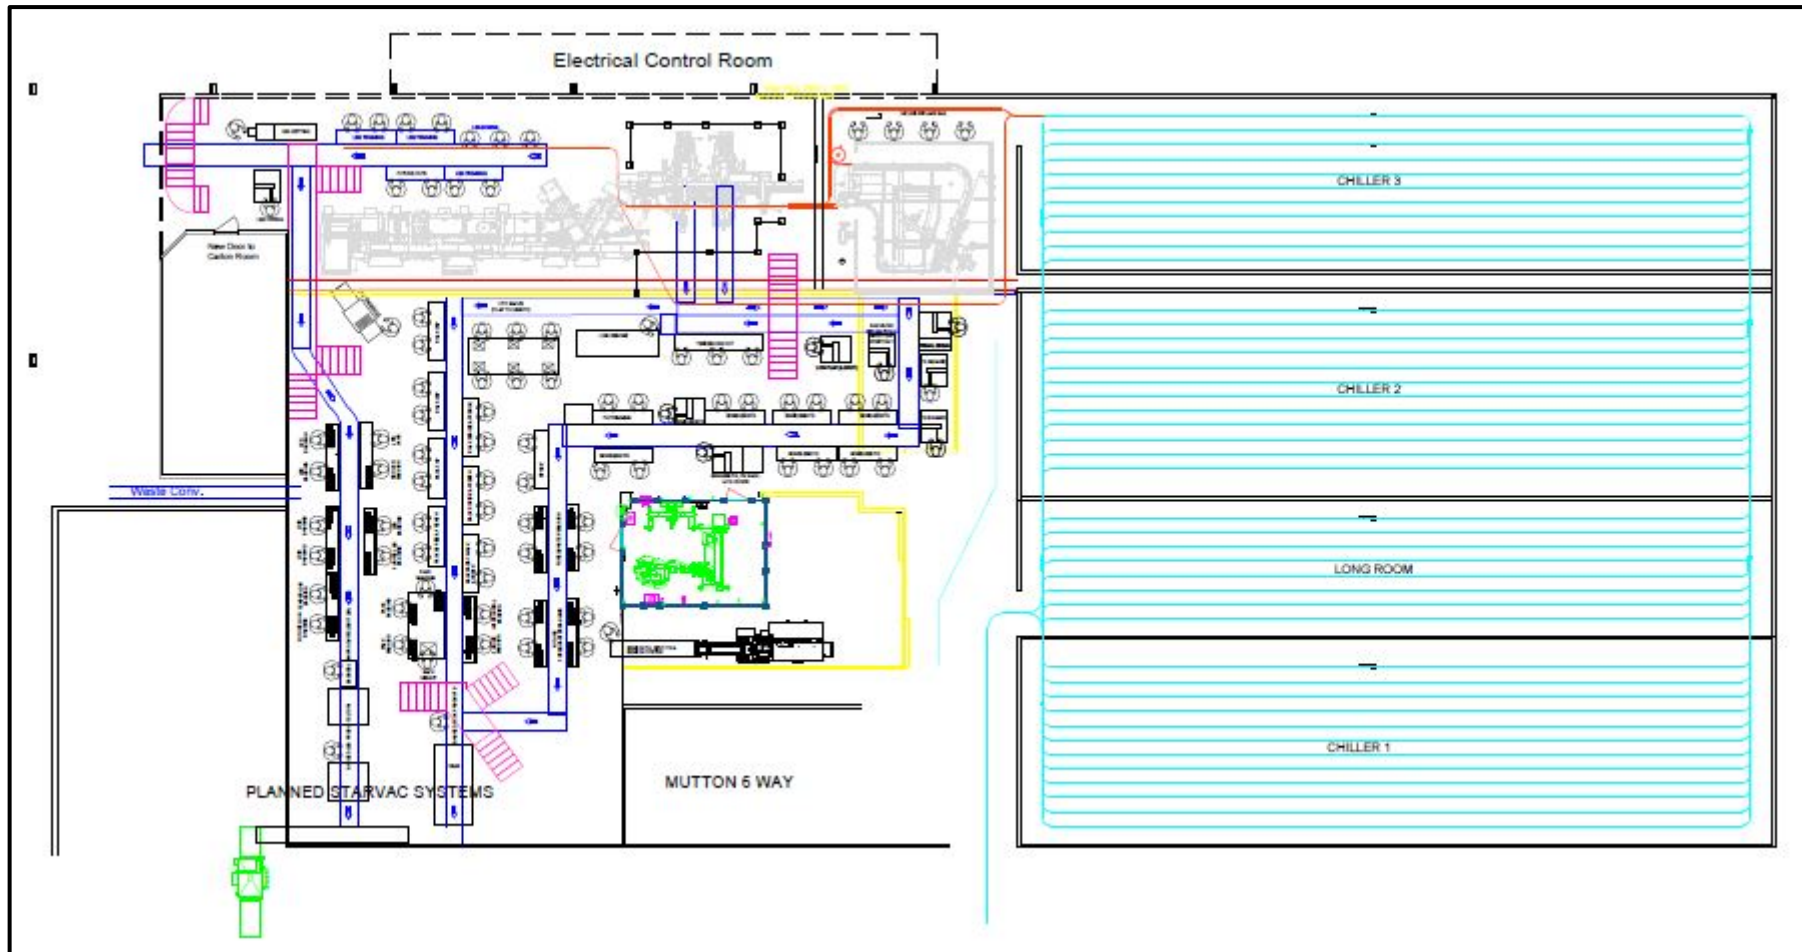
Integration of DEXA Single Tower and Dual Tower and Middle Machine Linked with the Forequarter Machine
